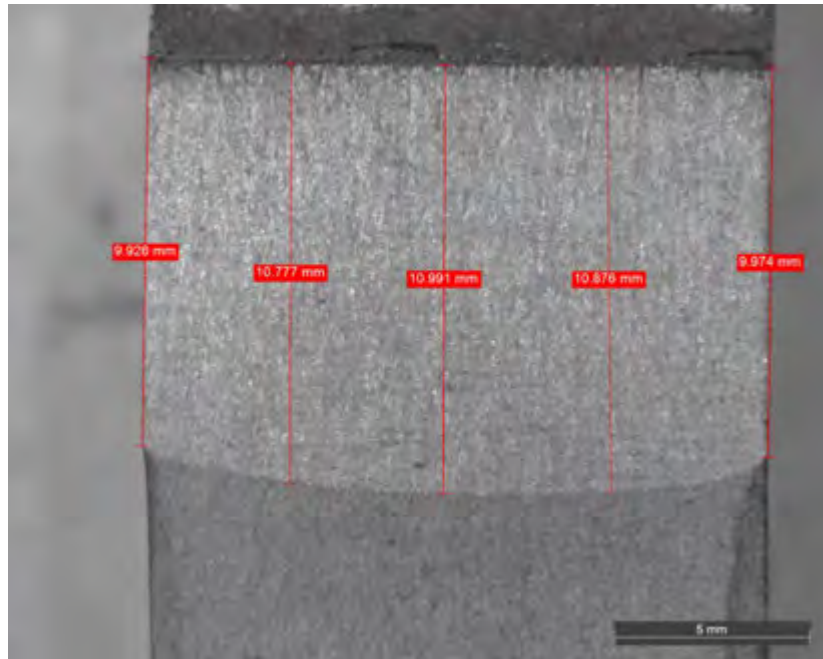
Crack length measurement of fracture surface of specimen VERTICAL – 1.
